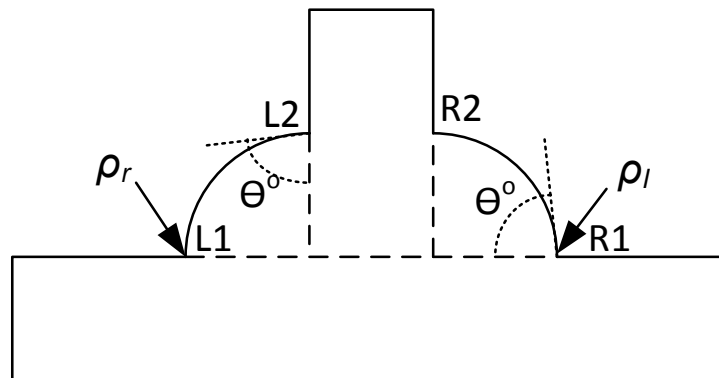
Definitions and location of flank angle, θ° and weld toe radius, ρ
